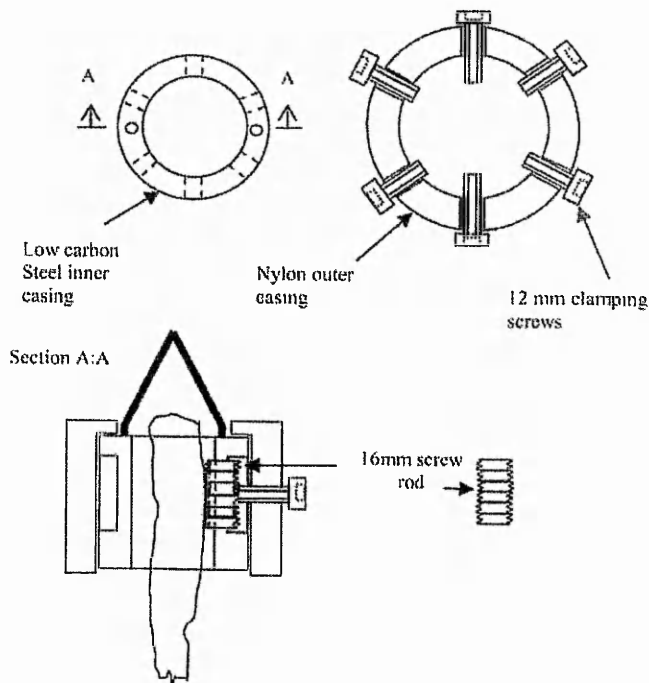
Screw clamp for roots 15 – 28 mm. Top. Plan view. Bottom Cross section through A:A. (Drawings by S. Goodman).
